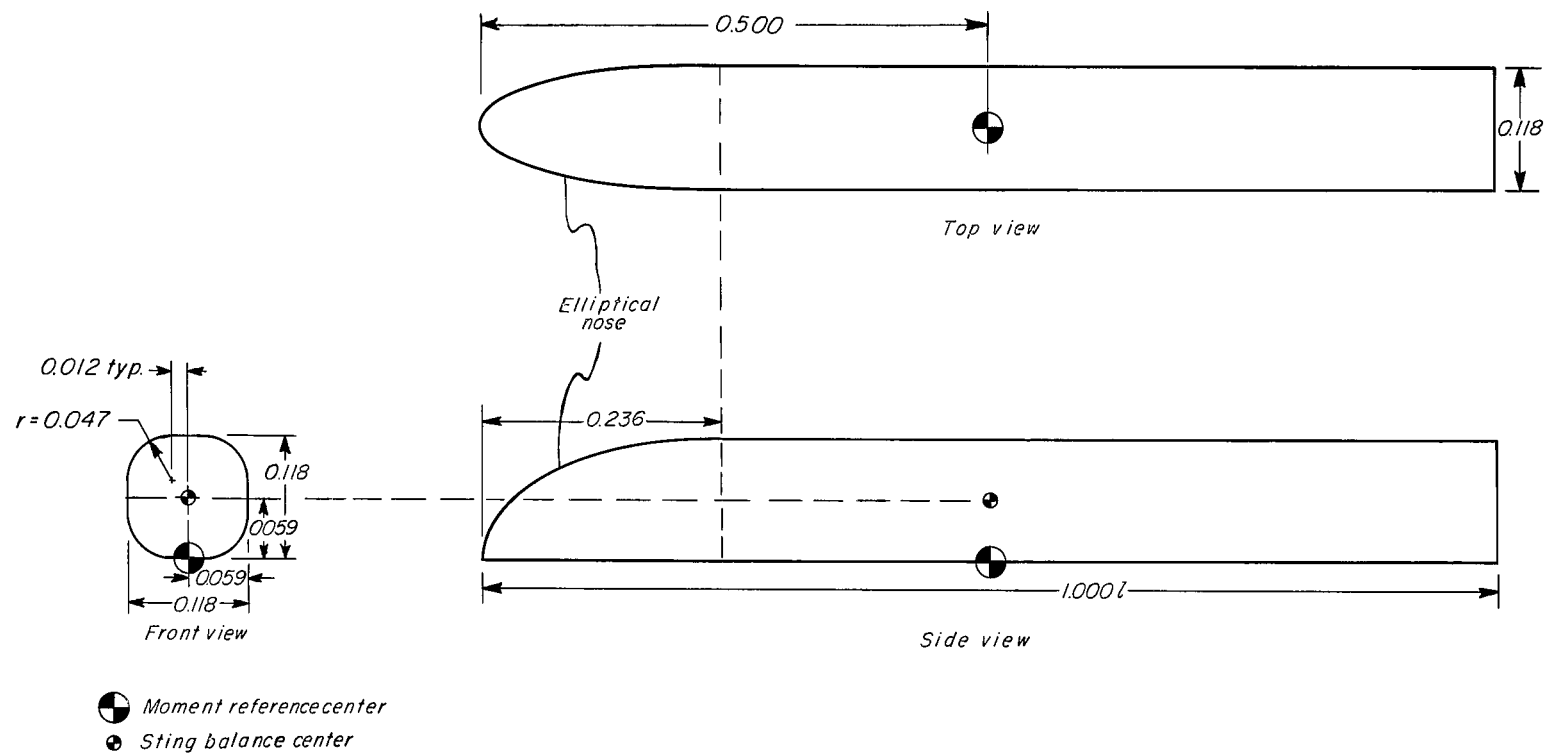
Drawing of square-type cross-section configuration. All dimensions based on vehicle length, $l = 72$ inches (183 cm).
